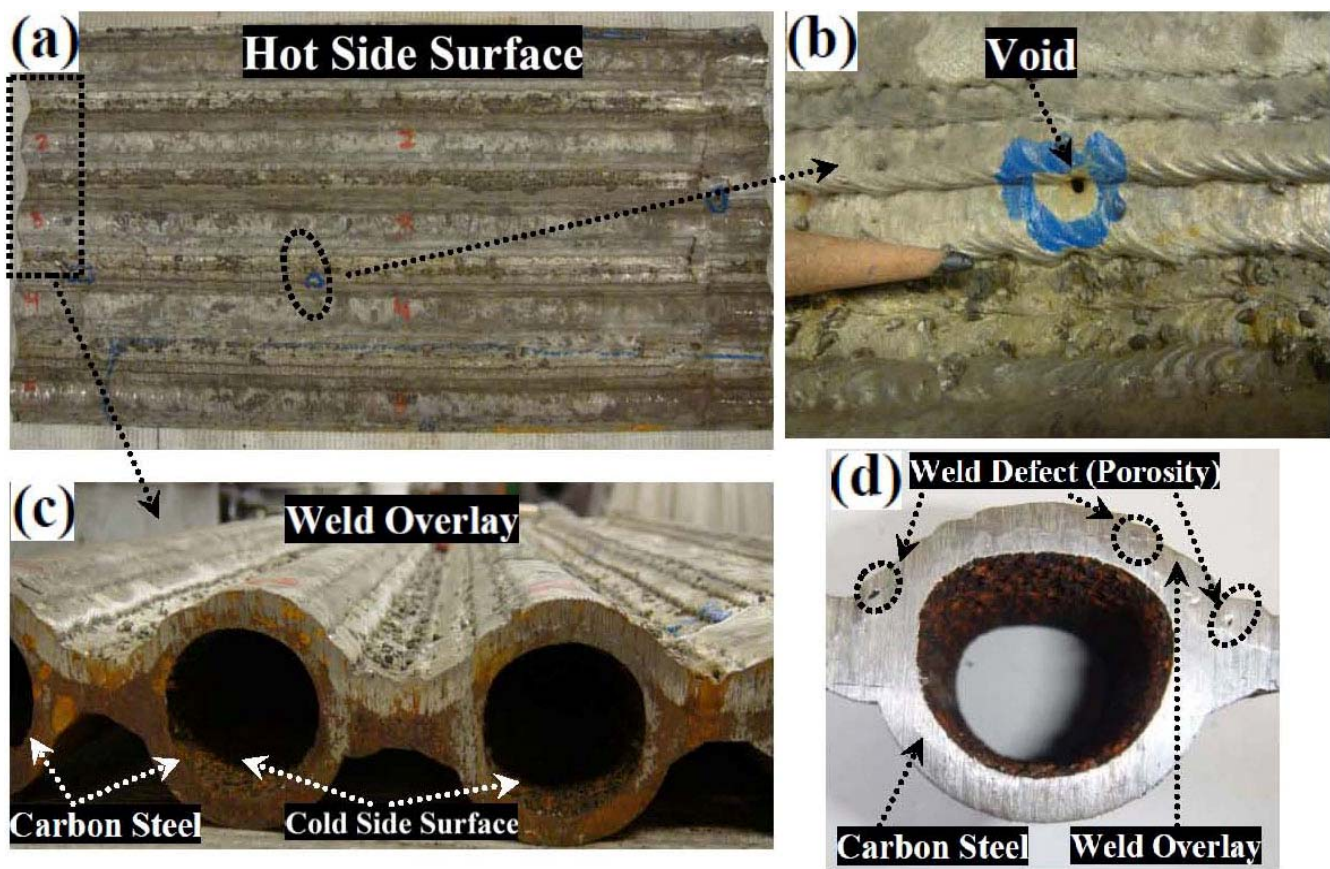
a) and c) A sample of the failed waterwall, coated by the weld overlay alloy 625, b) A well-developed cavity formed in the weld overlay in the boundary of two weld beads, and d) A cross section of the failed tube after grinding, showing the presence of porosities in the weld overlay.
